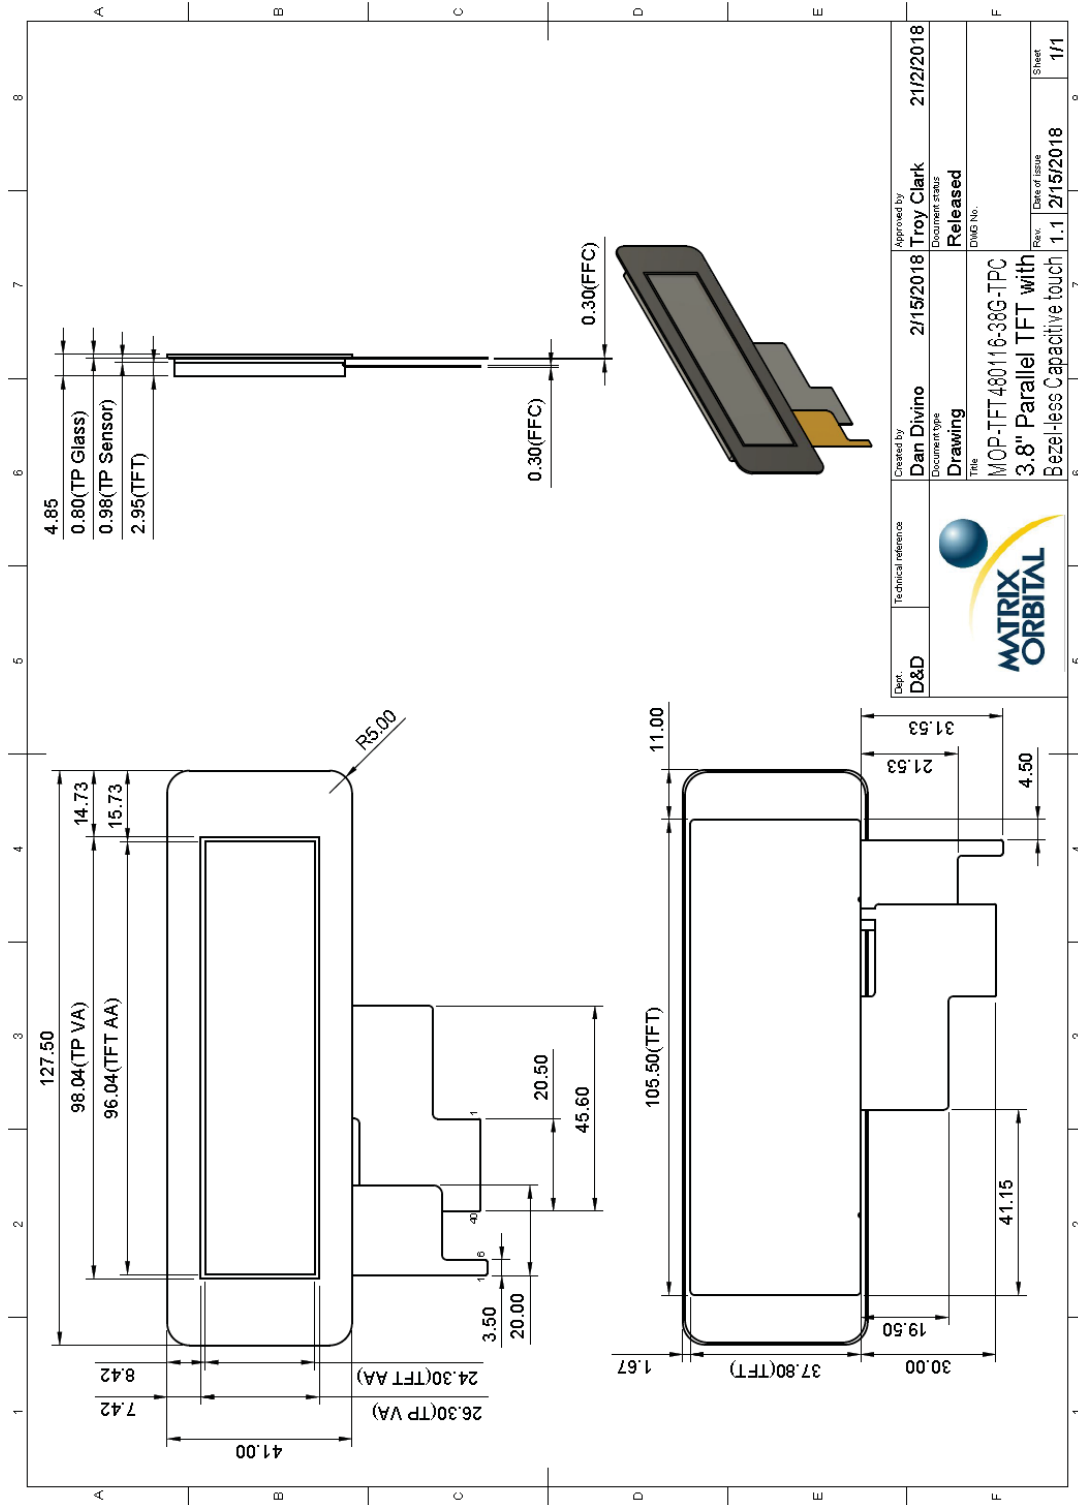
MOP-TFT480116-38G-BLH-TPC Drawing
